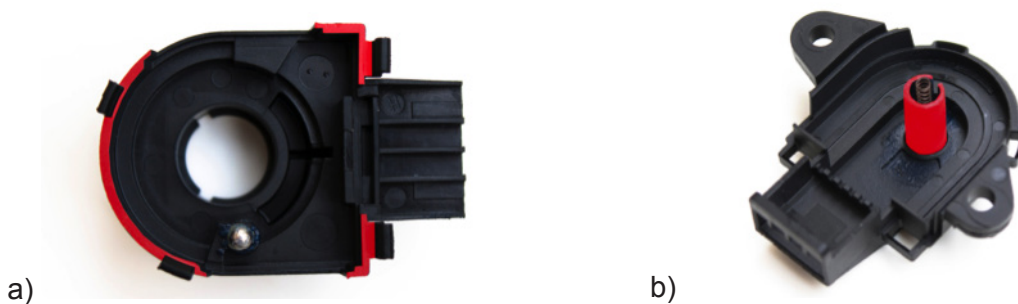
Large contact surfaces between a) upper and lower housing, b) housing and rotating switch plate
